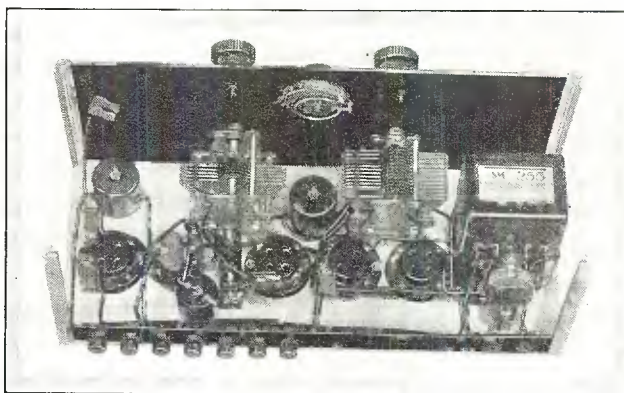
This photograph shows the inside of the aluminum shield with all parts in place and properly wired. The photograph is taken upside down, with the bottom, back and two side shields removed
